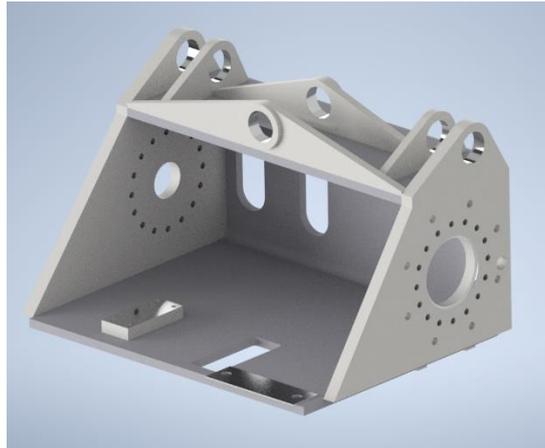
The welded central steel structure with machined surfaces for alignment of the various transmission components.
